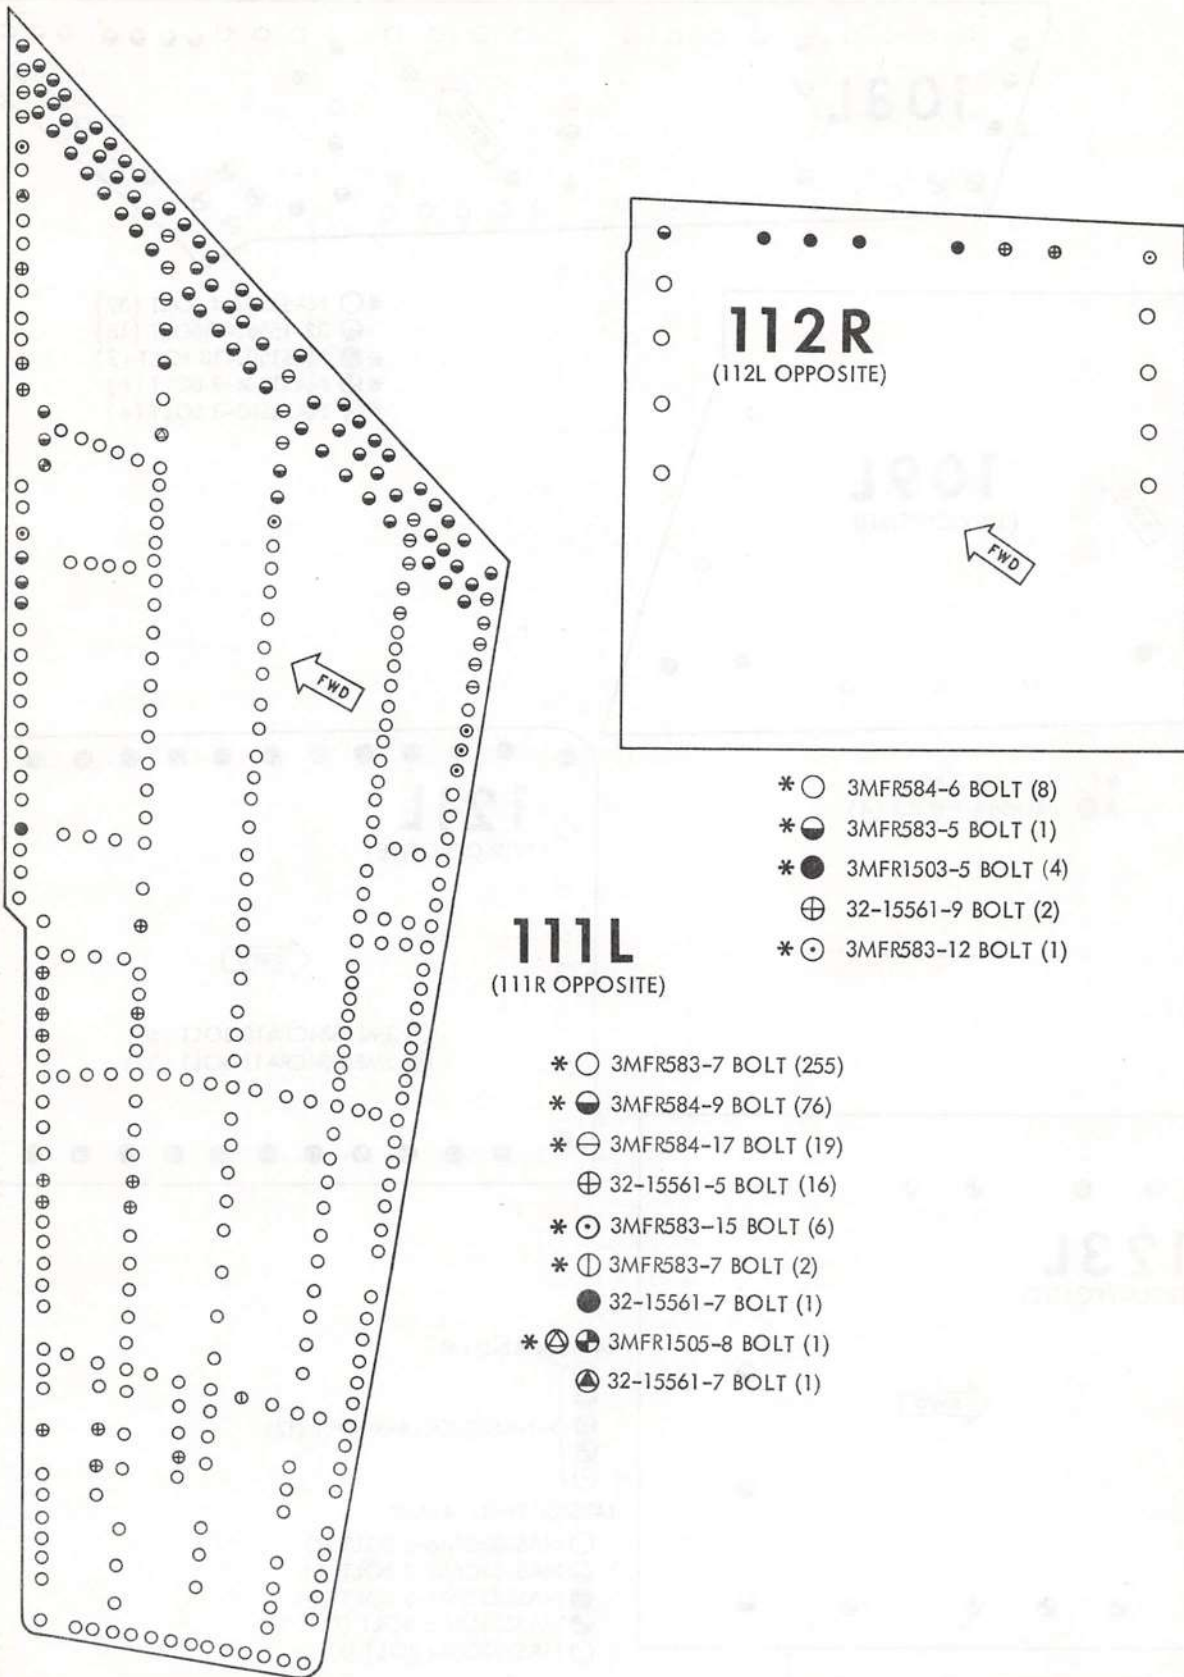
External Access Door Fastener Patterns (Sheet 4 of 7)
